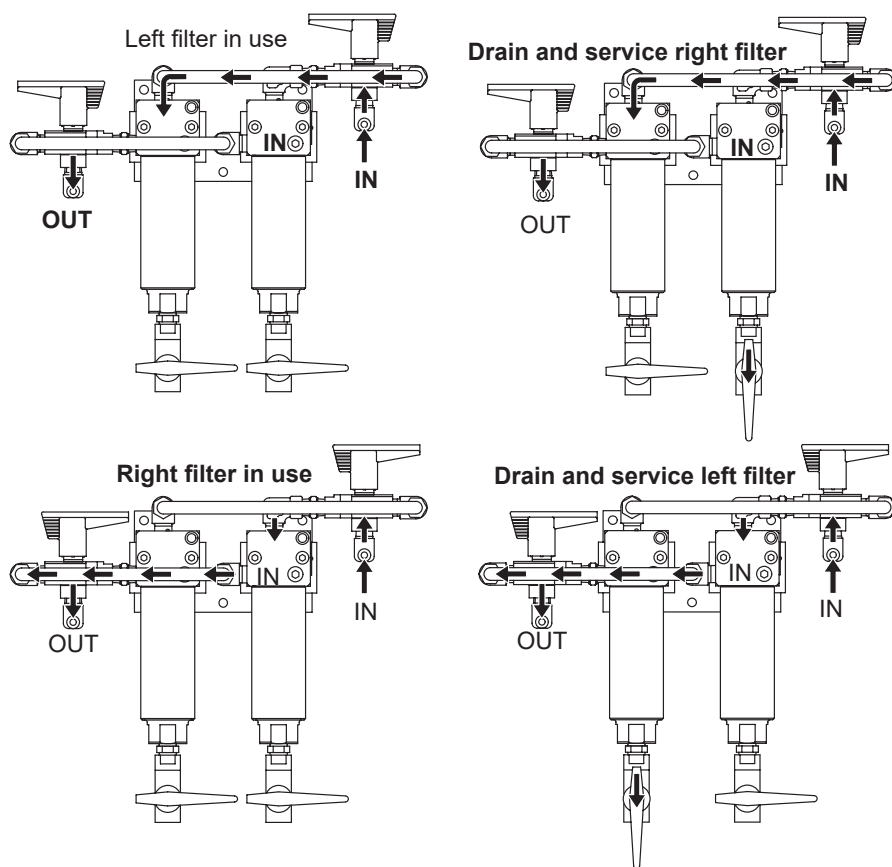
Handle Positions –Inverted Dual Filter Assembly with Three-Way Ball Valve –Standard
